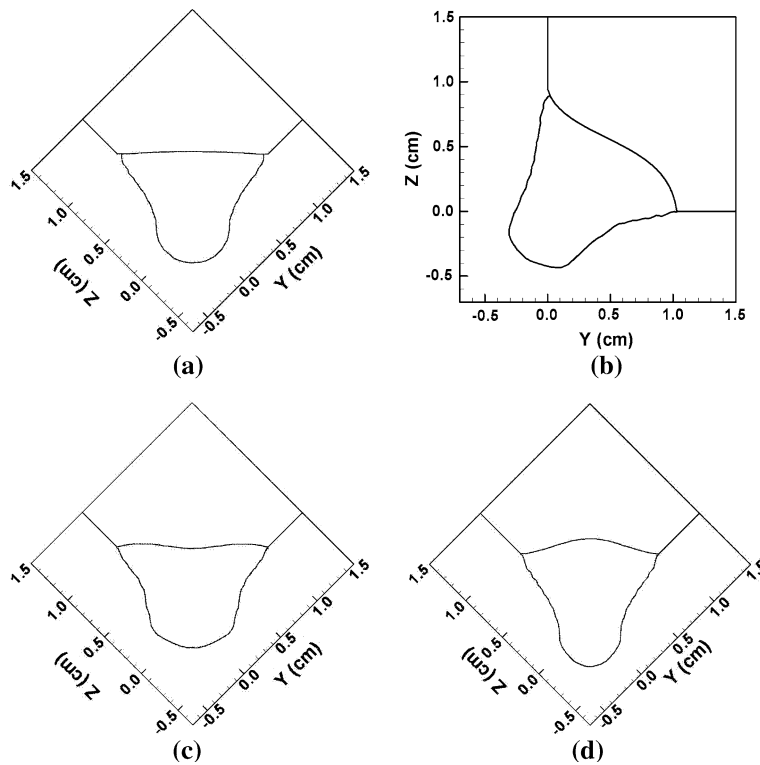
The solidified reinforced weld bead geometry during (a) horizontal welding of V-shaped fillet joint, (b) horizontal welding of L-shaped fillet joint, (c) downhill welding of V-shaped fillet joint at an angle of 10 deg, and (d) uphill welding of V-shaped fillet joint at an angle of 10 deg. The calculated weld bead geometries in these figures are obtained by projecting the transverse planes over each other.
